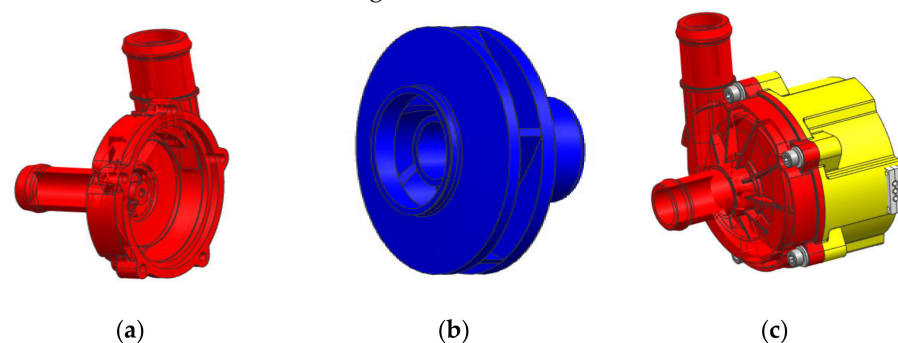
Structure diagram of automotive electronic water pump: (a) pump barrel, (b) impeller, and (c) motor base.
